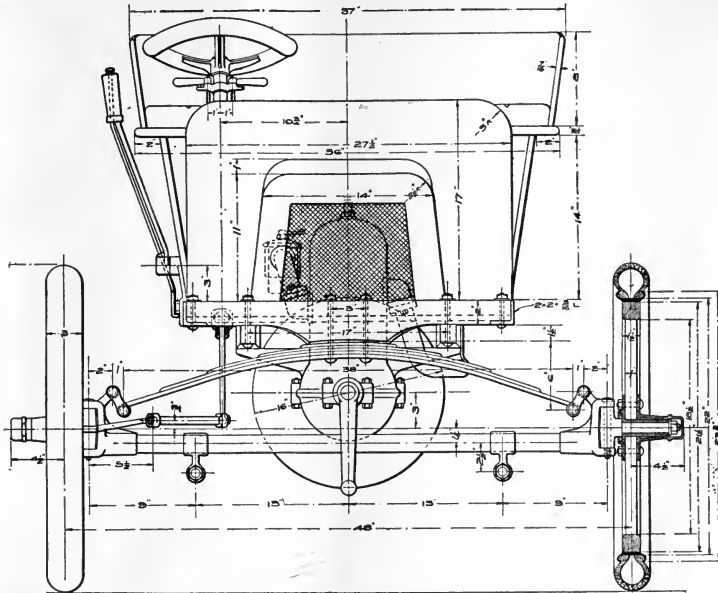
END ELEVATION OF COMPLETE MACHINE.
